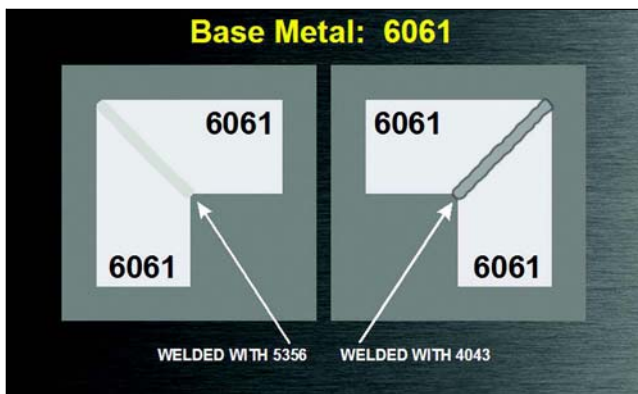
Weld Made Using 6061-T6 Base Metal and 4043 Filler Metal Would Not Produce a Good Color Match After Anodizing
